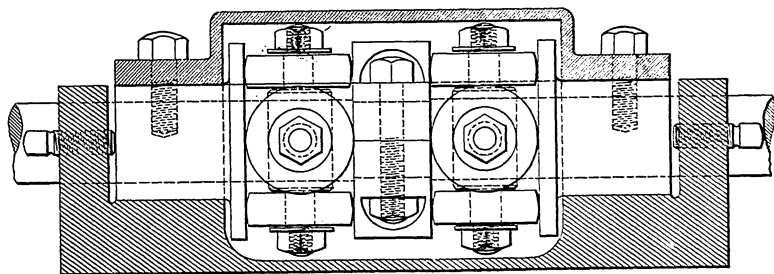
Longitudinal Elevation of Thrust Bearing.
